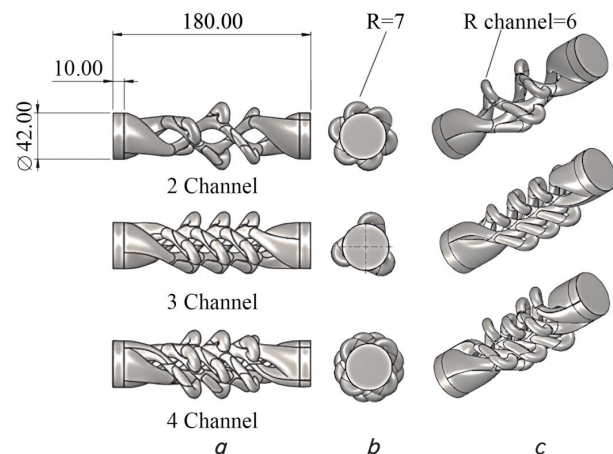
Geometry design for the three types: a – front side; b – side view; c – 3-D
